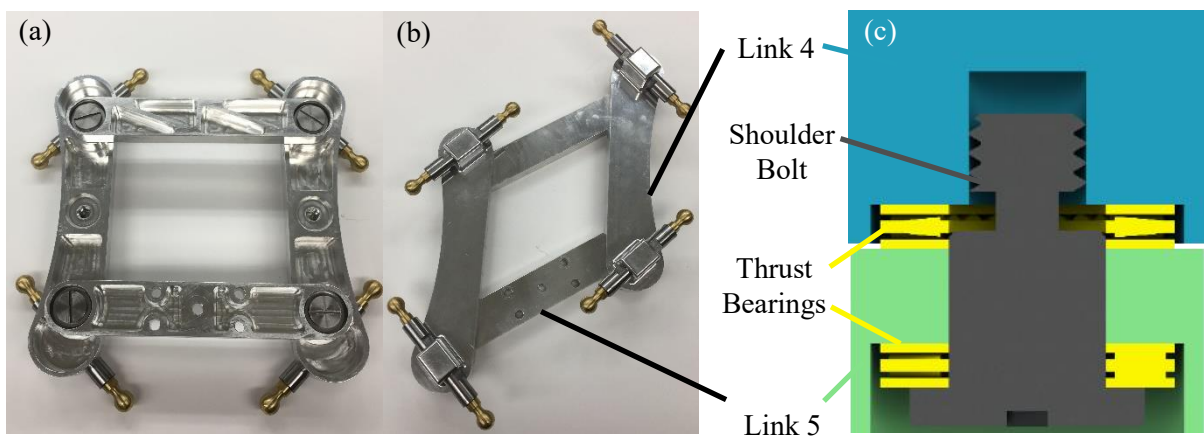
Details of the End Effector Rotation Mechanism. (a) Bottom view of the final design. (b) Top View of the final design. (c) Detailed cross-section of the joints.
